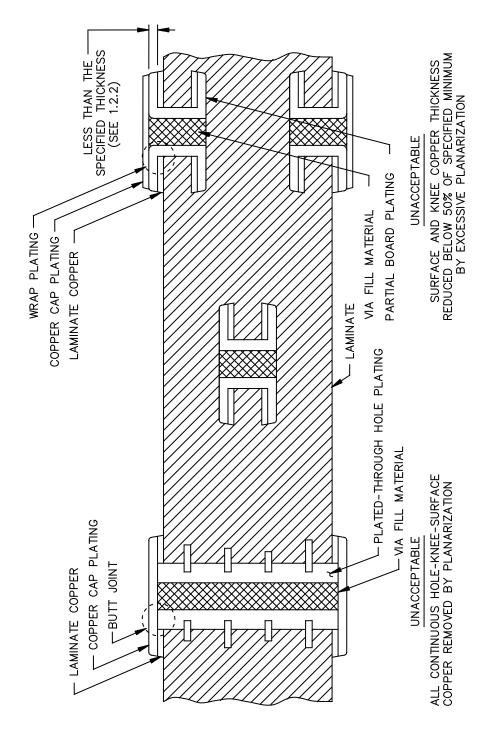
Unacceptable plated-through hole wrap plating (continuous hole-knee-surface copper plating).
